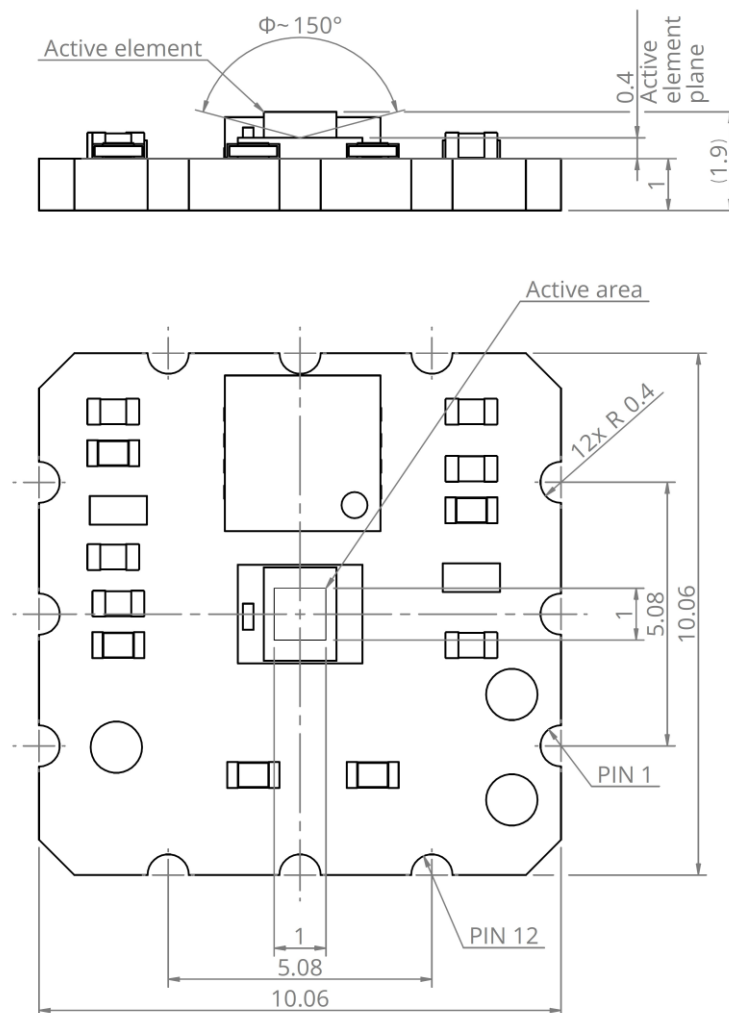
Dimensions of the AM03100-02 detectin module (given in mm)
